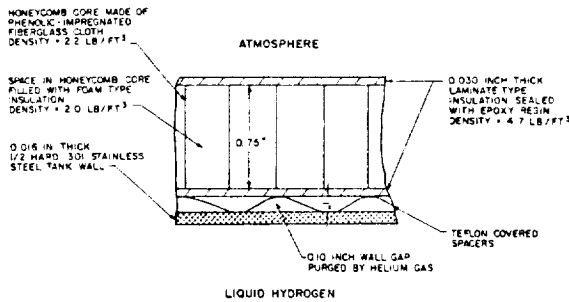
Construction elements of a typical liquid hydrogen tank insulation design (external type).
